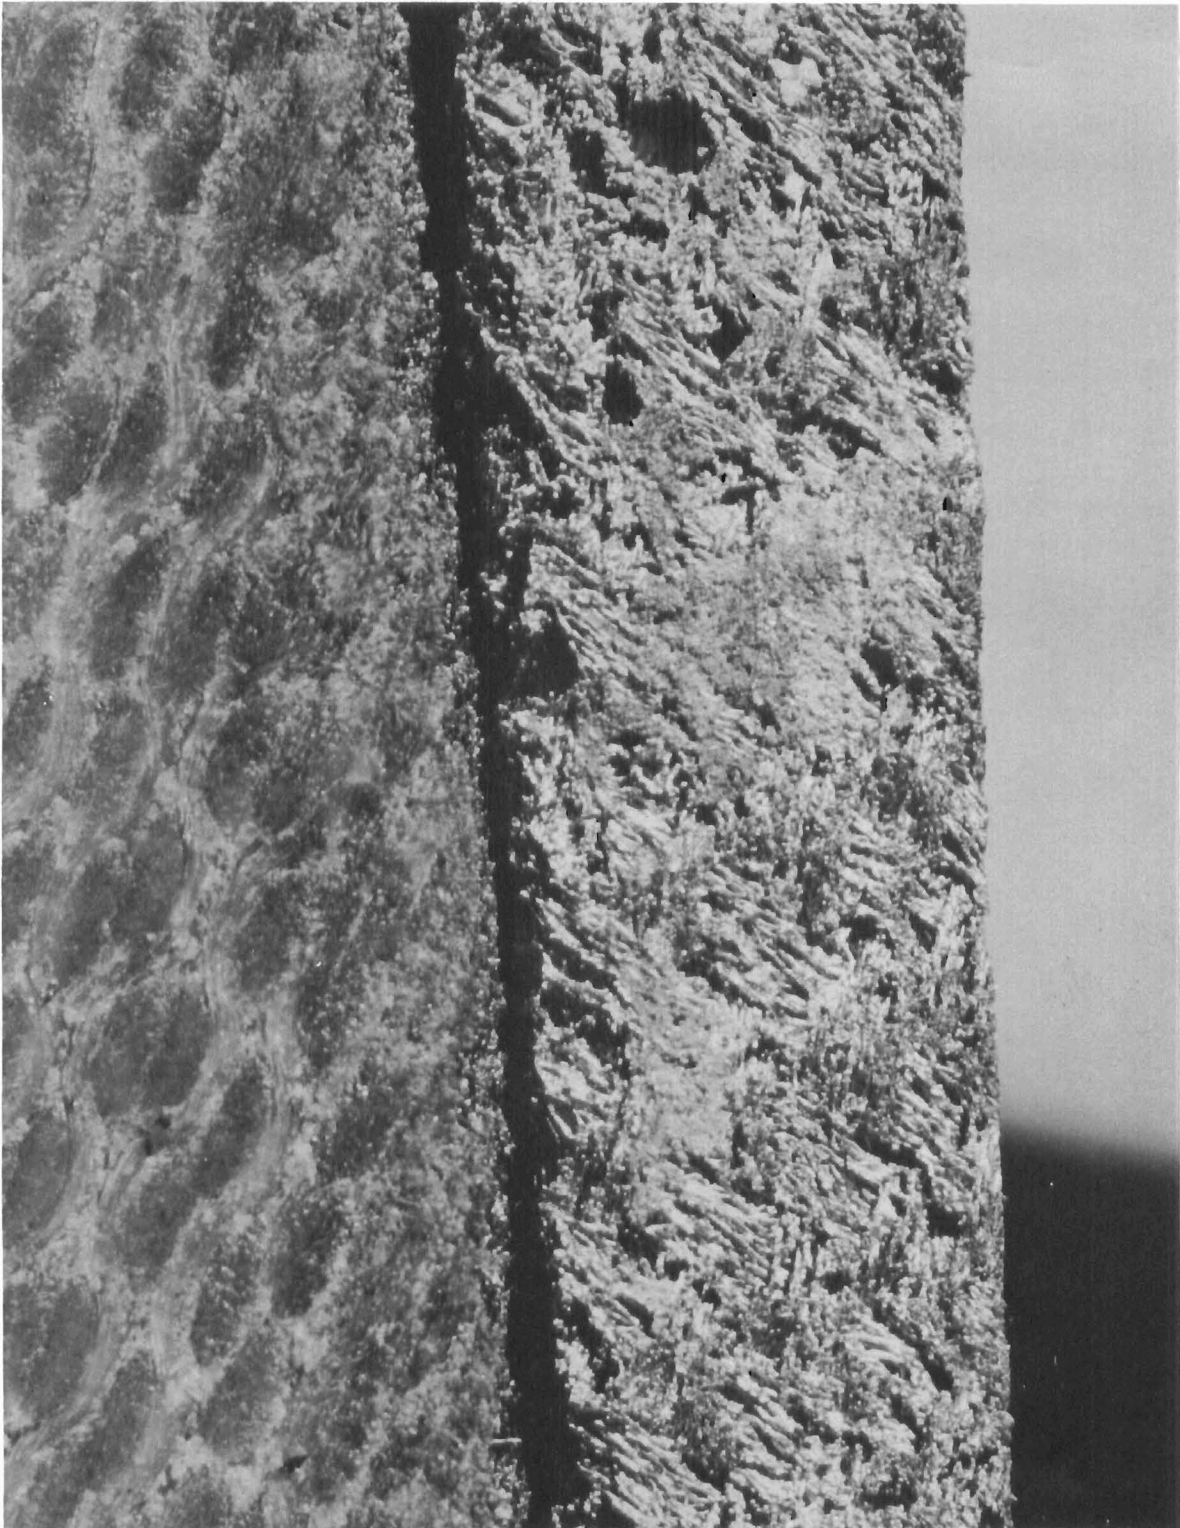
Cross-Sectional View of the Y-31 Specimen after
